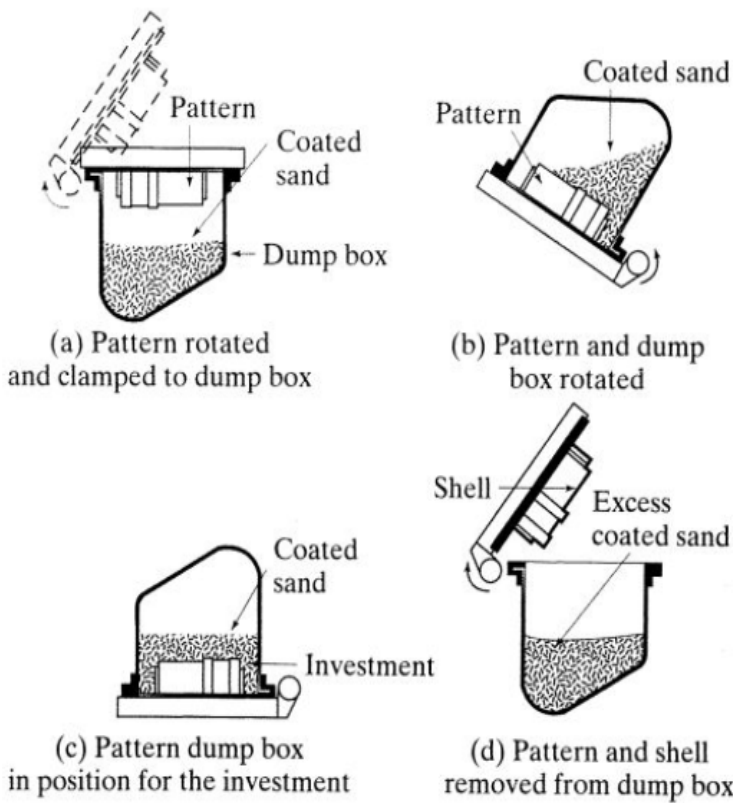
Making the shell-mold [Source: Kalpakjian & Schmid] Figure 6. Shell mold casting
